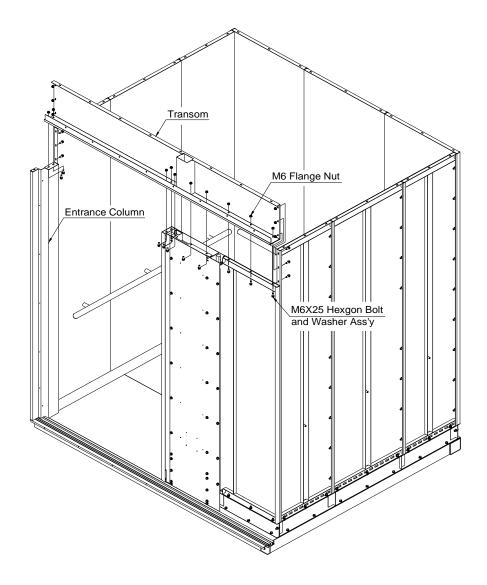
F. TRANSOM ASSEMBLY
